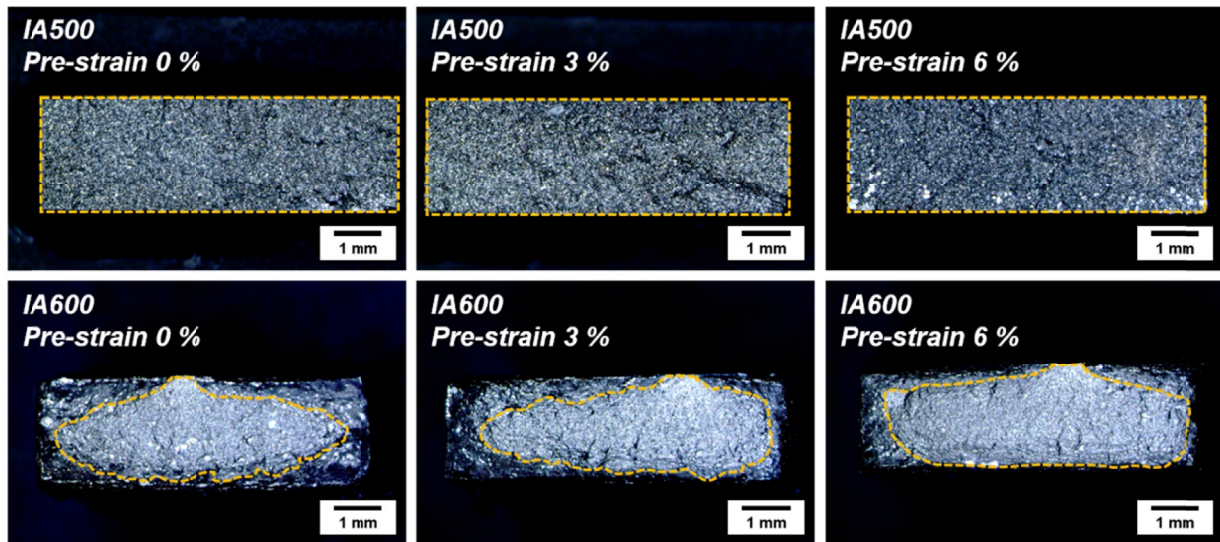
Stereo microscope fractographs of the tensile fractured surfaces of the hydrogen charged IA500 and IA600 steels intercritically annealed at 500°C and 600°C, respectively. The yellow dashed boxes indicate brittle fractured regions
